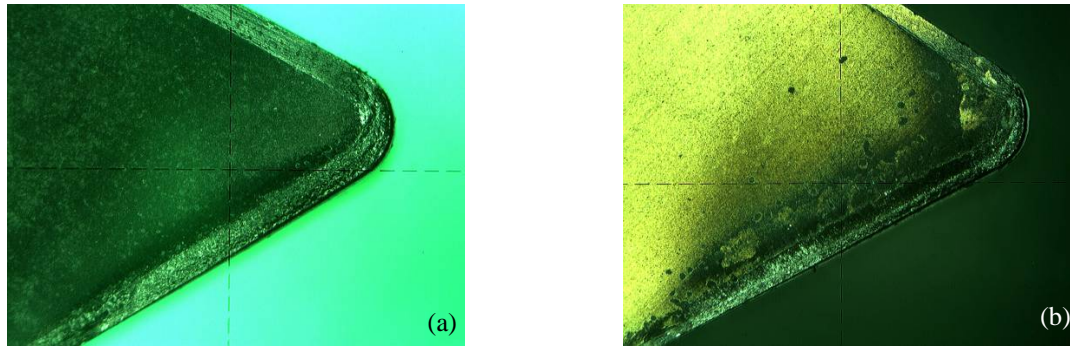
Tool wear on rake face in high speed turning of grey cast iron (a – tool A, b – tool B).
